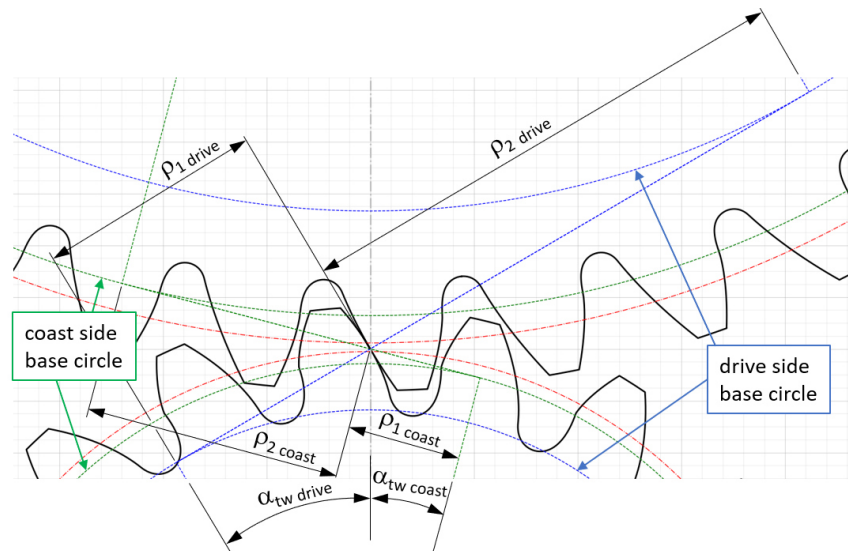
Osculation radii of involute gearset for single tooth contact in the mesh point.
